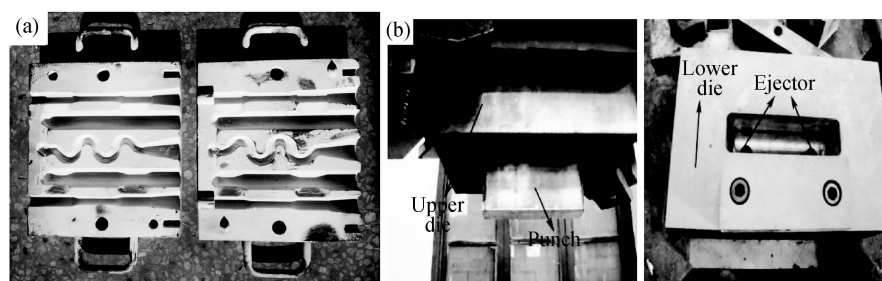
Metal mold (a) and squeeze casting mold (b)
